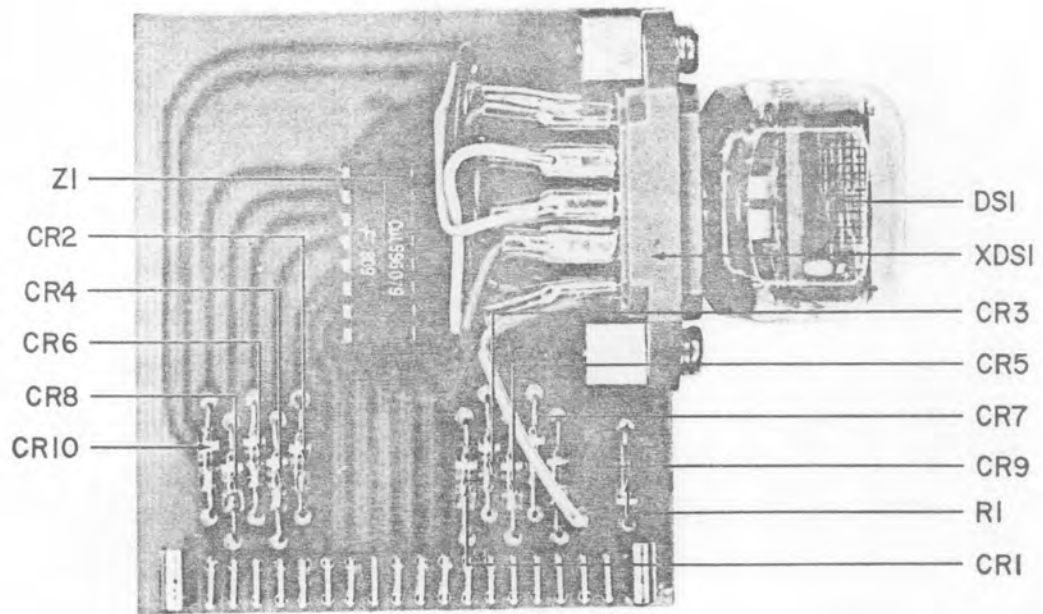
Type 79353 Count, Decode and Display (A8A4 thru A8A7), Component Locations
